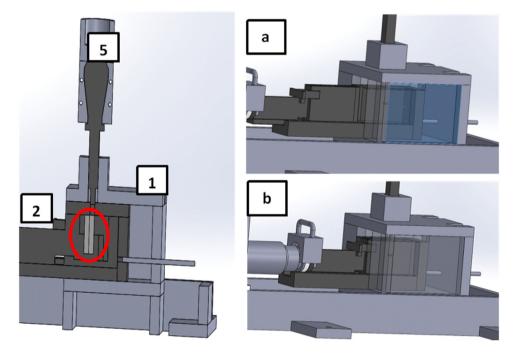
Interior view of heating chamber (1), shearing and welding cartridge (2) along with the welded samples and upper compressing punch (5) – on the left, and movement of shearing and welding cartridge assembly: (a) exerted cartridge assembly, (b) cartridge in heating system – on the right.
